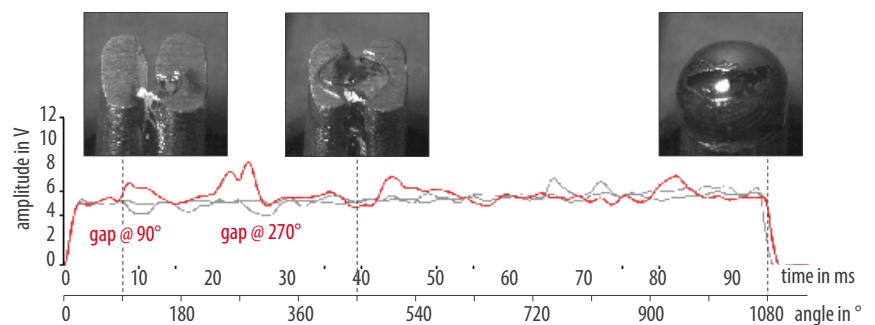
Hairpin welding – misalignment with 0.2 mm gap
